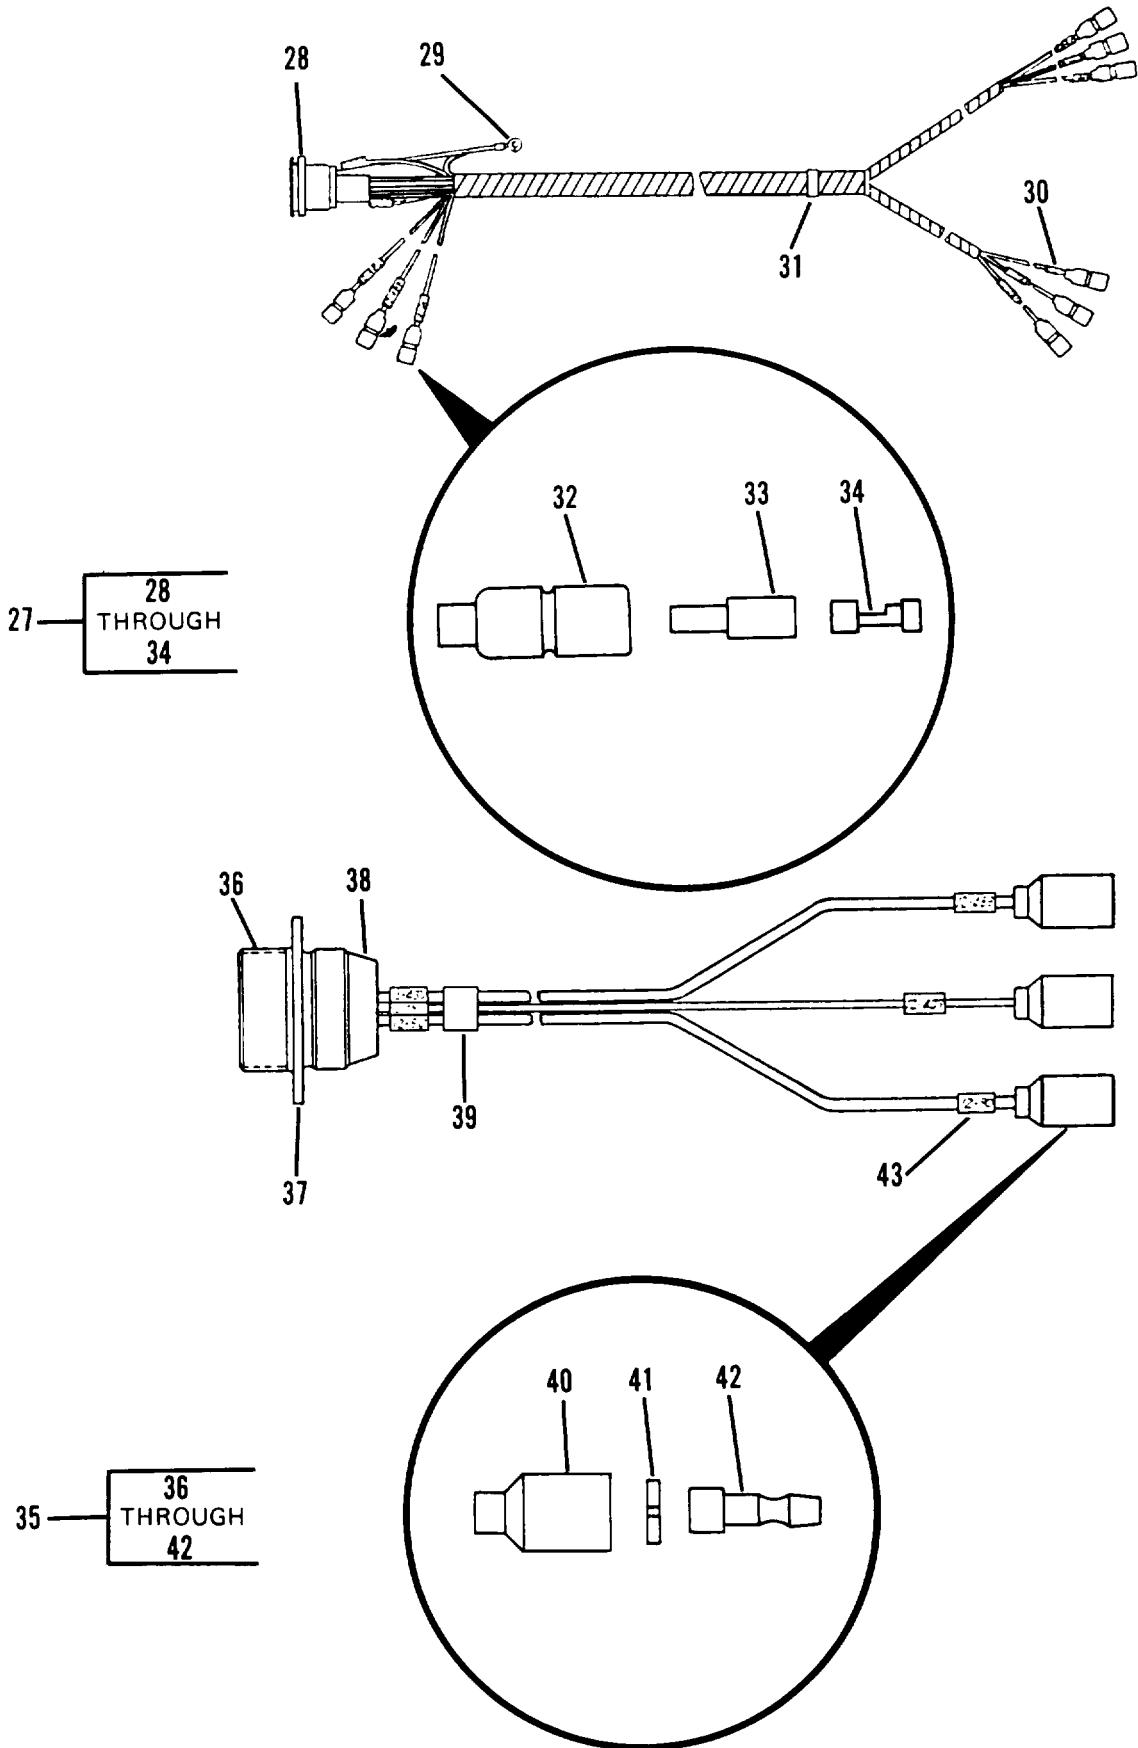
Chassis Electrical System Components (Sheet 2 of 2)
